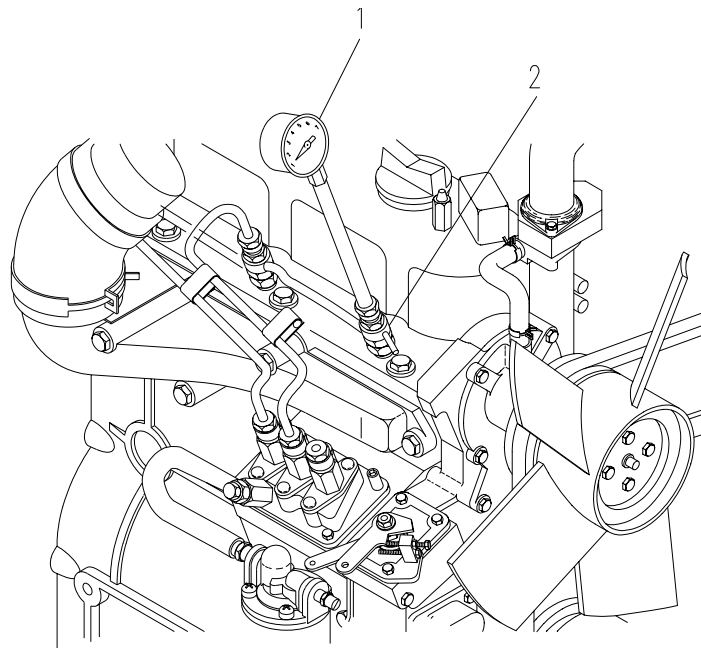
Diesel Engine (Sheet 1 of 11)
